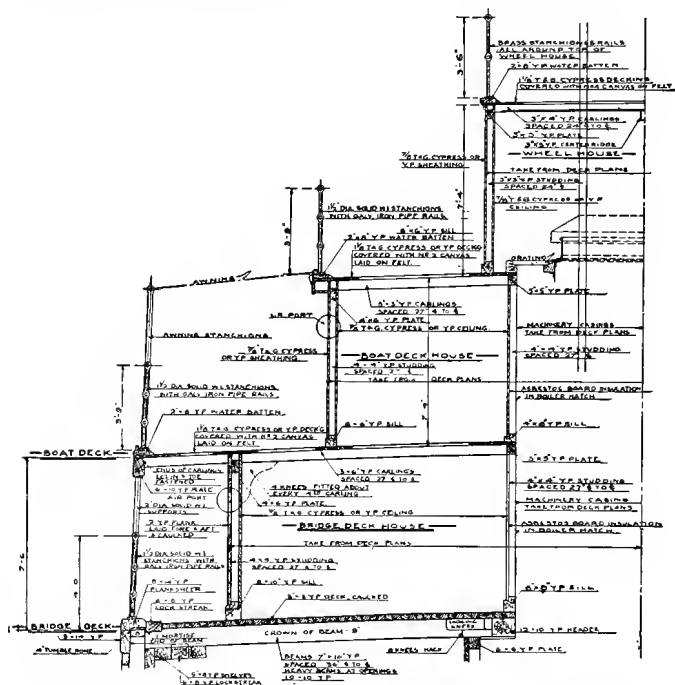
Section from Bridge Deck to Top of Wheelhouse of Standard Wooden Steamship.
